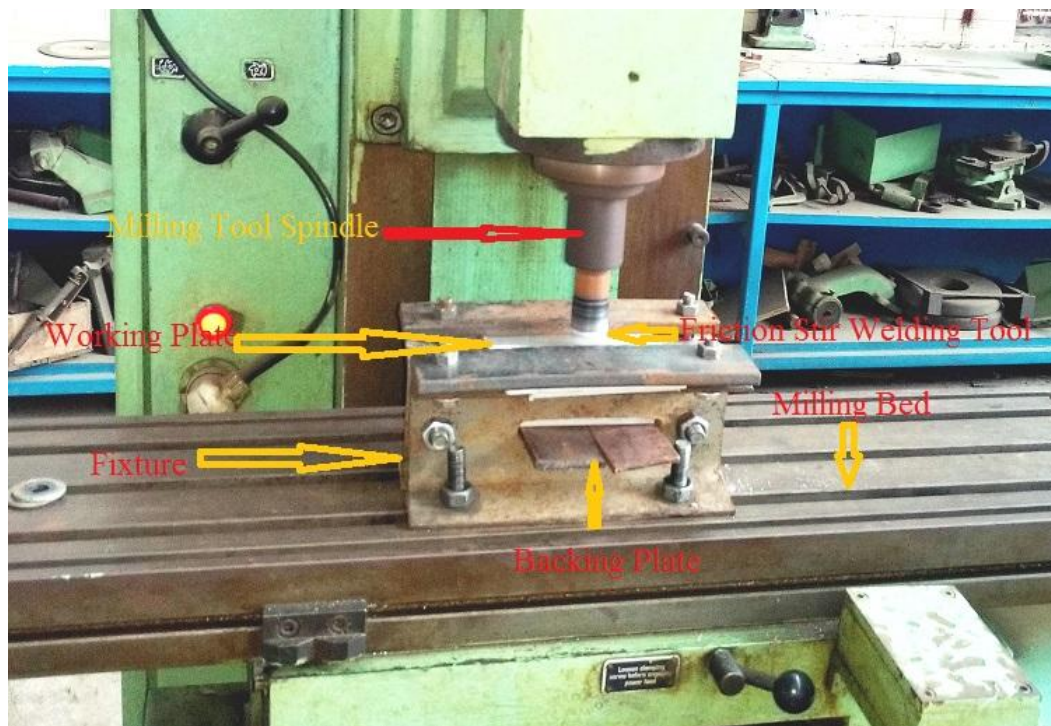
Experimental setup used for the present study: Friction Stir Welding setup
